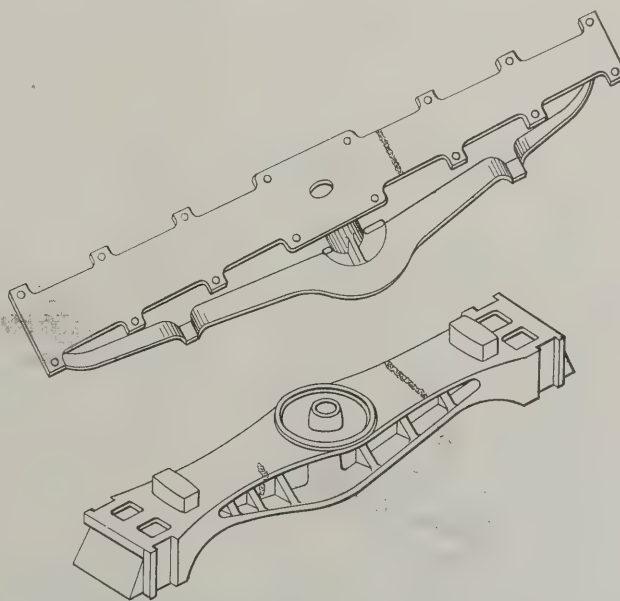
Steel Car Bolster Effectively Repaired by Gas Welding
